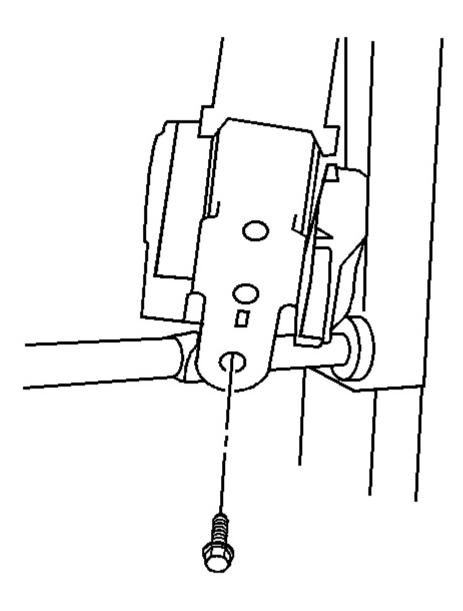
Lower Seat Belt Retractor Bolt - Left Front Courtesy of GENERAL MOTORS CORP.
